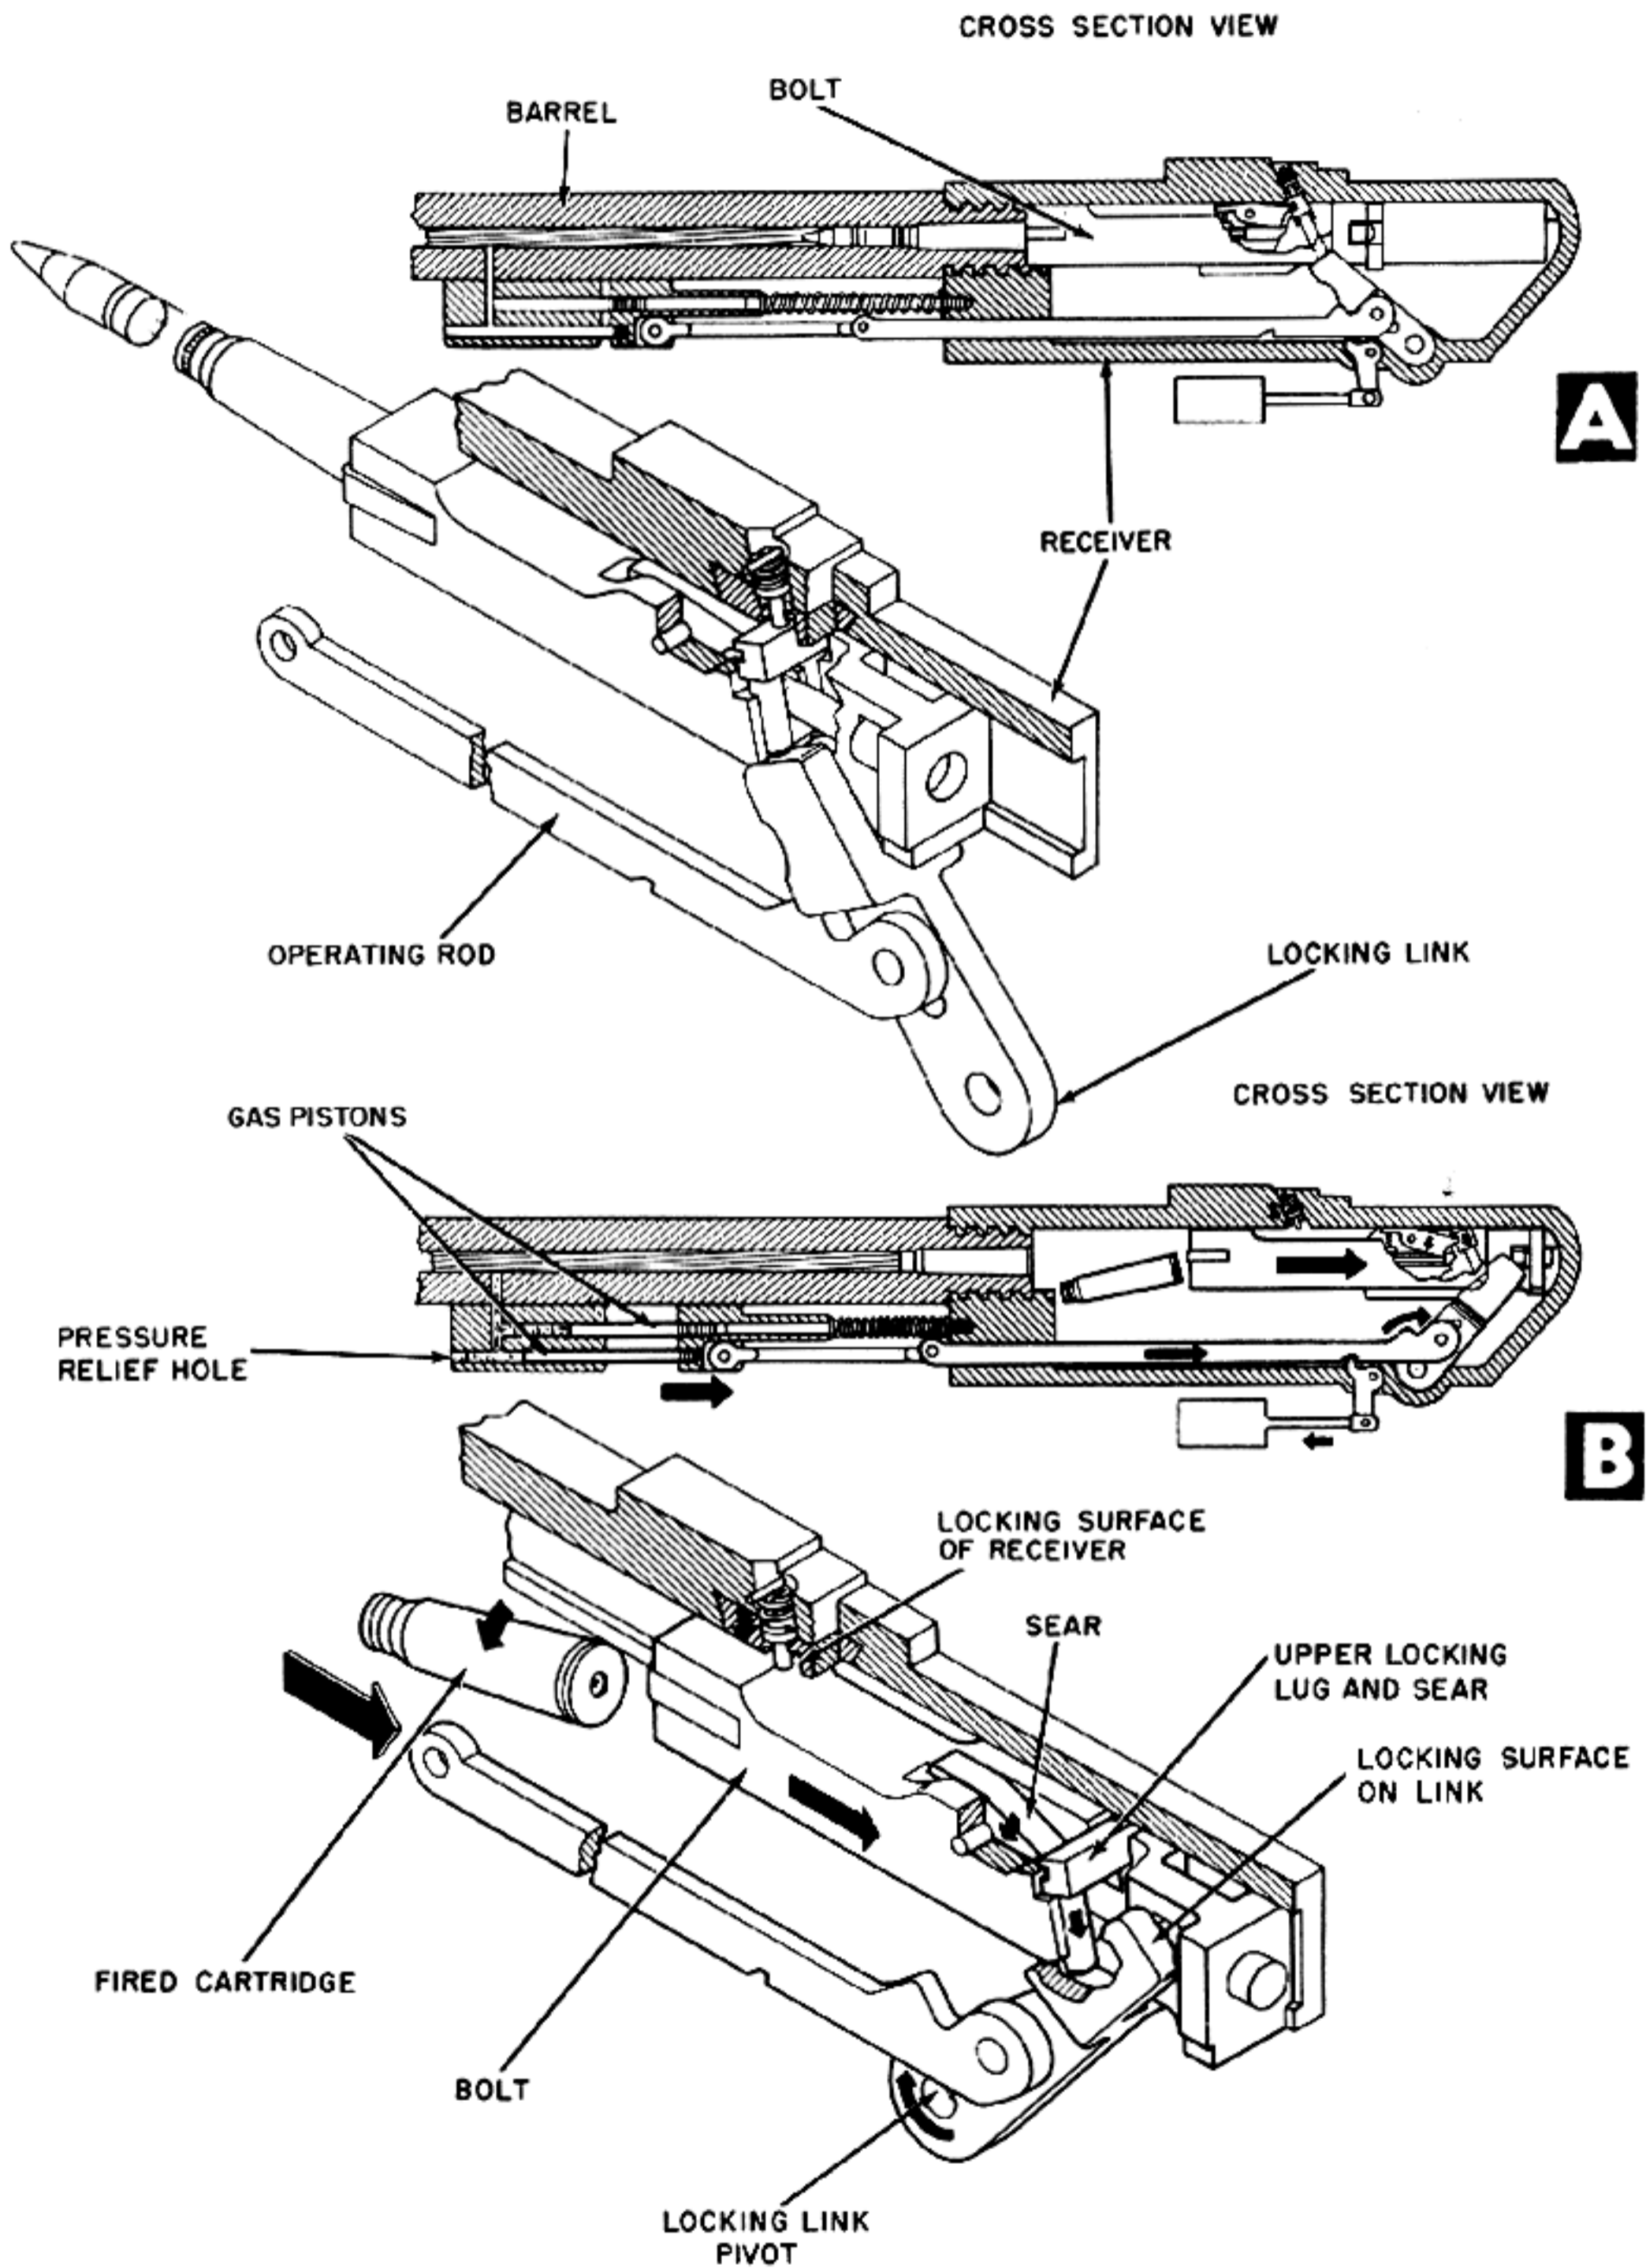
Spring Pressure Unlocks Locking Lug When Link Support Is Removed.
